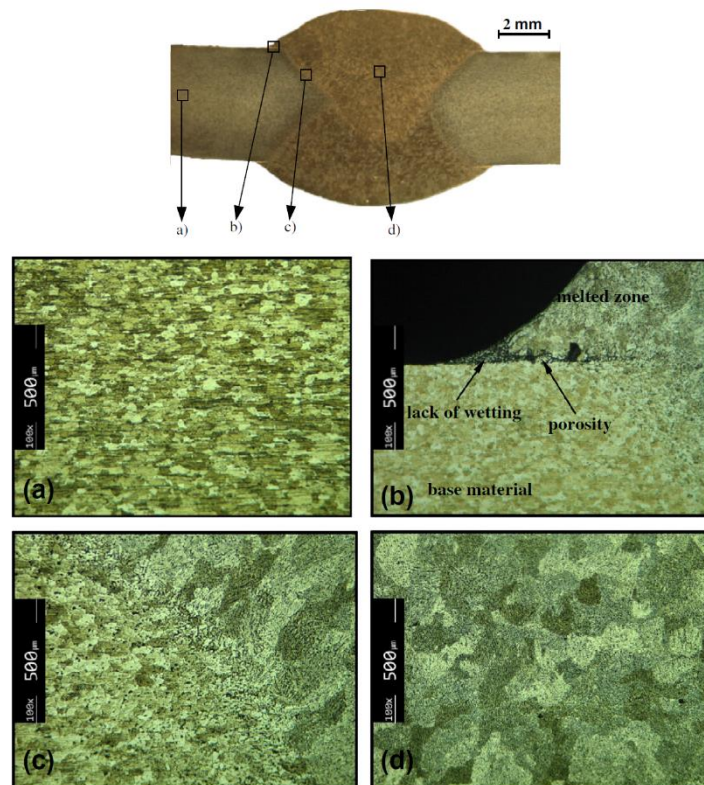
Metallographic analysis of MIG welds: (a) base material; (b) weld toe; (c) fusion line; and (d) melted zone.
